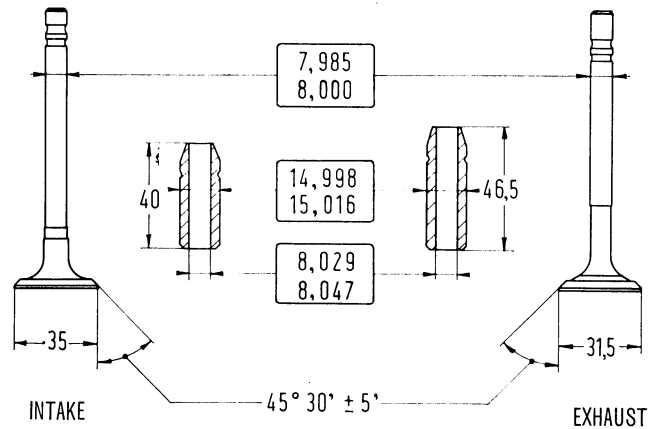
Critical dimensions of intake and exhaust valves and valve guides (in mm). Engine 115 C.005.
